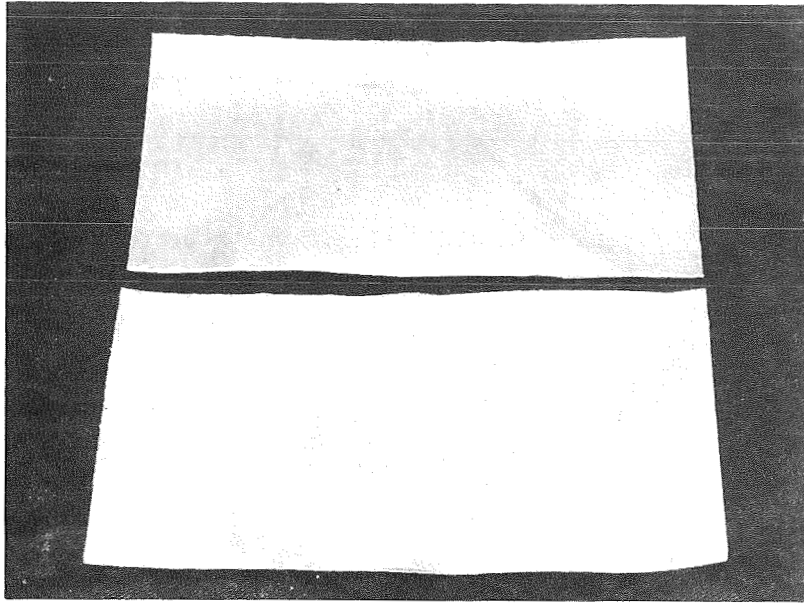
Hot Knife Cut Multilayer Separator Blanks
